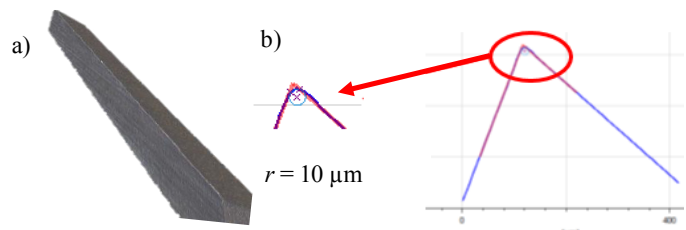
a) Broaching tooth profile. b) Cutting edge radius.
